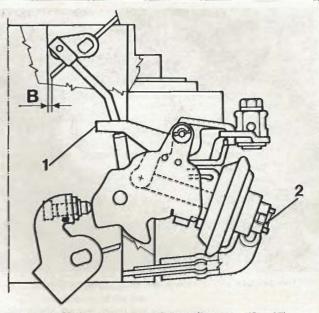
Choke vacuum pull-down adjustment (Sec 25)
